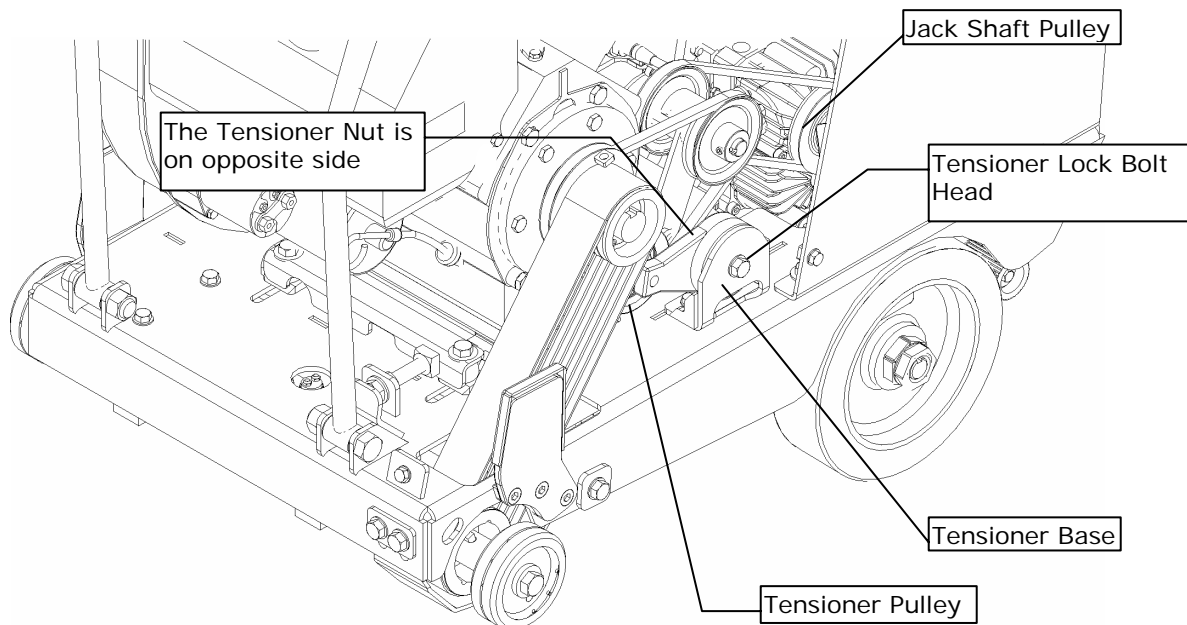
Jack Shaft Belt and Rotary Belt Tensioner System
